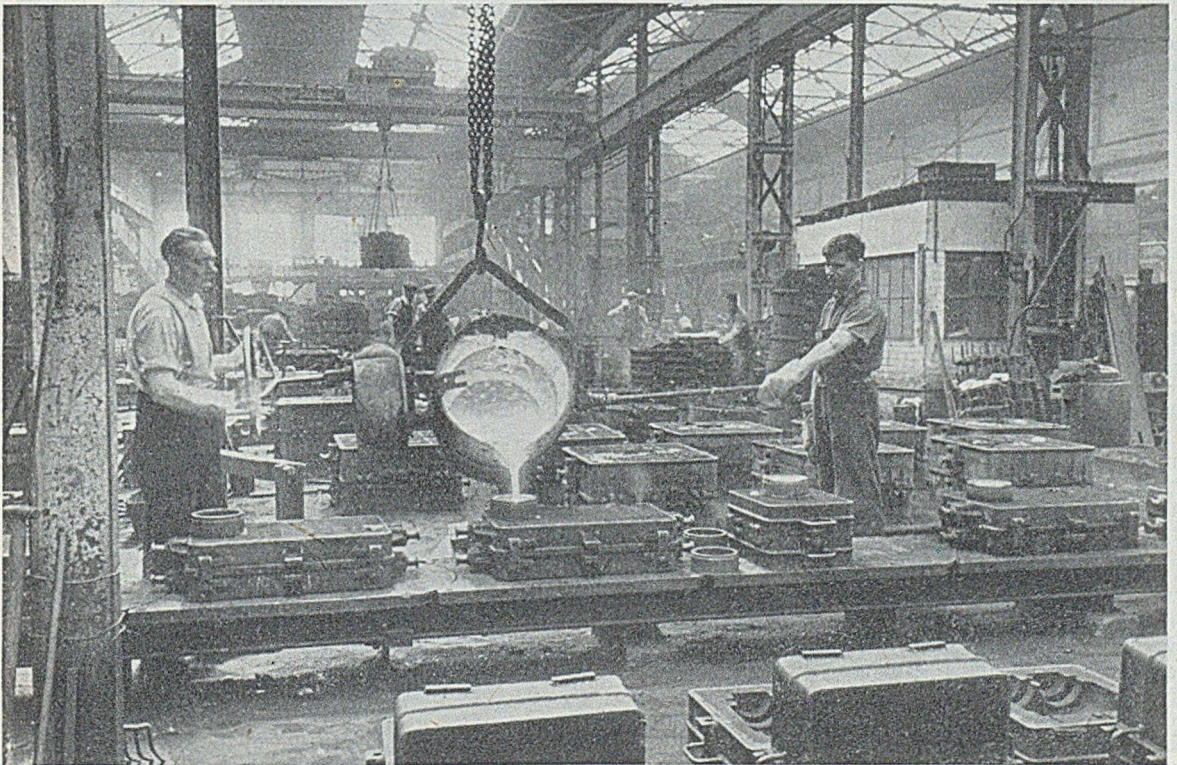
Mould Conveyor on which all the Small Castings are Produced. In the illustration the Ladle is being handled from a Crane, but there is also a Ladle Monorail Track to relieve the Load on this crane.
